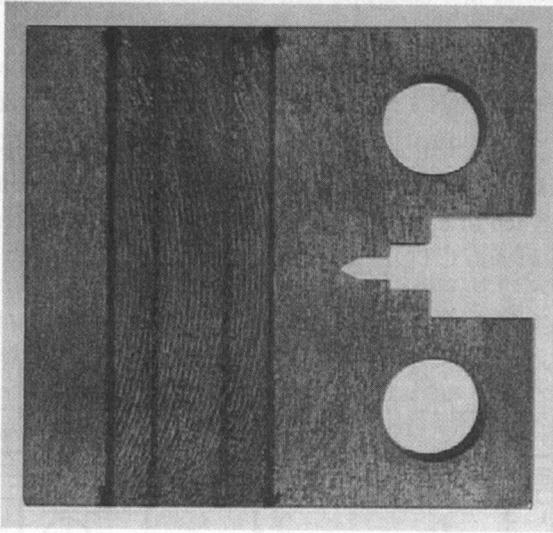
Compact specimen with transversal weld (root side of the weld).
